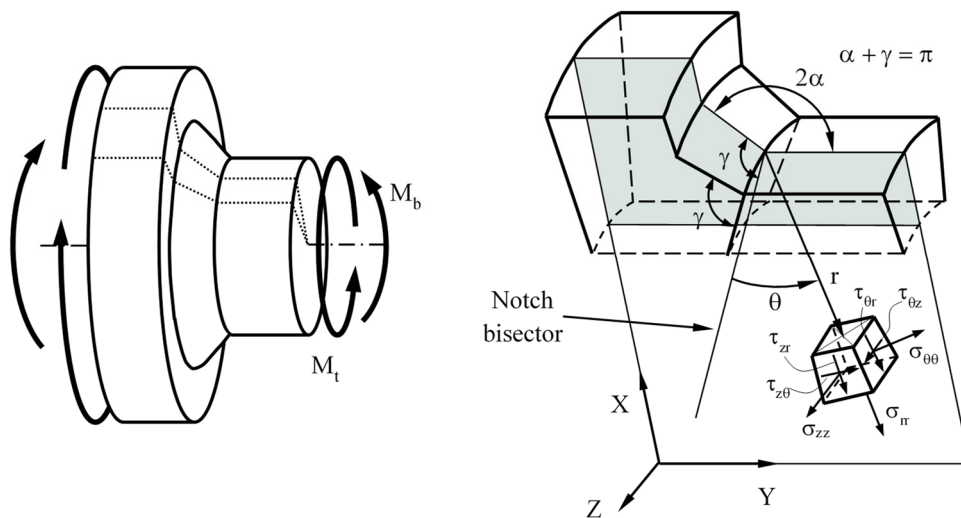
Polar reference system centred at the weld toe of a typical tube-to-flange welded joint geometry subjected to multiaxial bending and torsion loading. [Figure taken from [19]]
